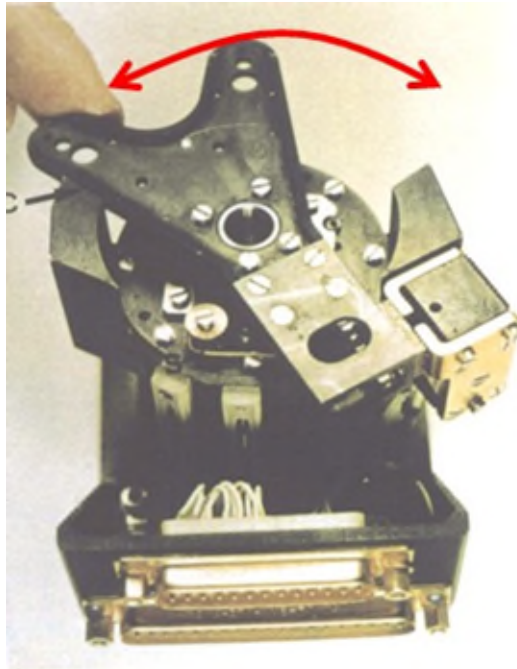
Anchor with cold welding at end stop (picture taken from [4])
